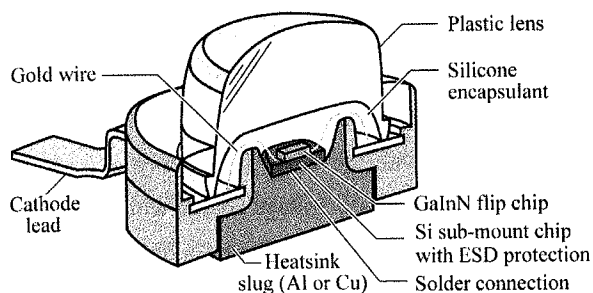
Cross section through high-power package. The heatsink slug can be soldered to a printed circuit board for efficient heat removal. This package, called the *Barracuda package*, was introduced by Lumileds Corp. (adapted from Krames, 2003).
